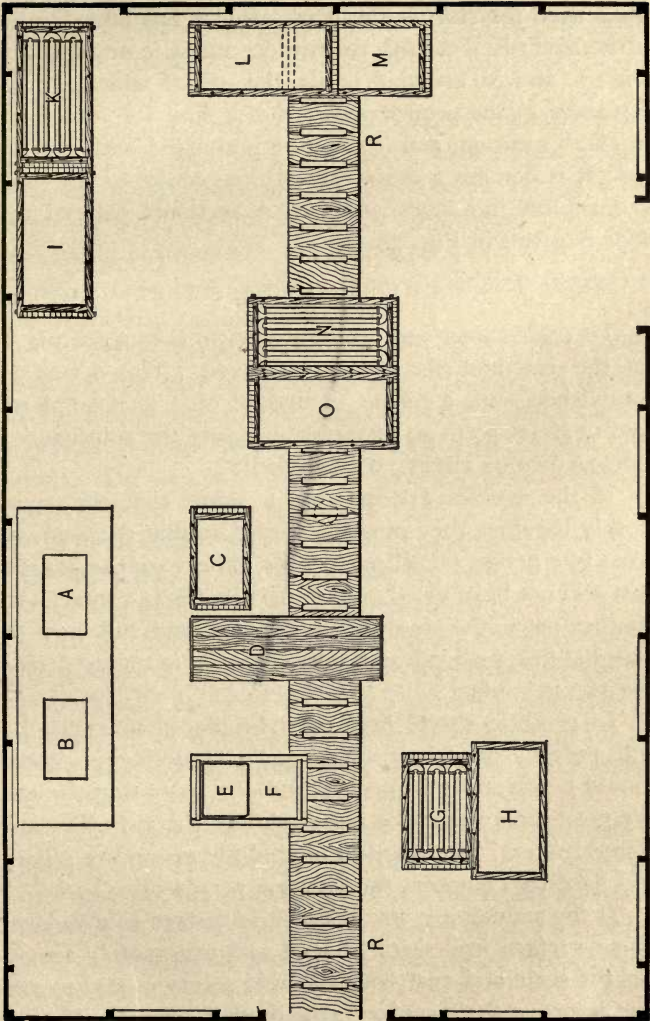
Ground Plan of Tinning Plant for General Work.
